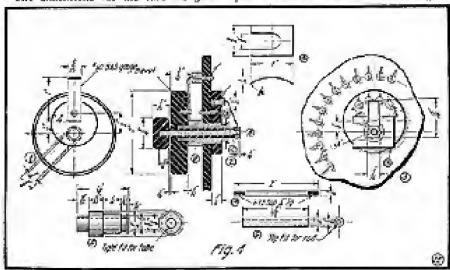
Parts Making Up "Primary" Switch of Couplet.
